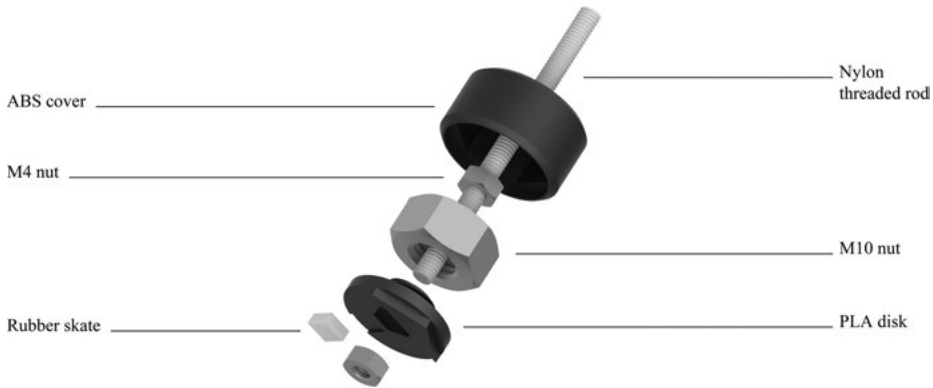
Exploded view of Manoeuvres' grain design. © Ianis Lallemand.
